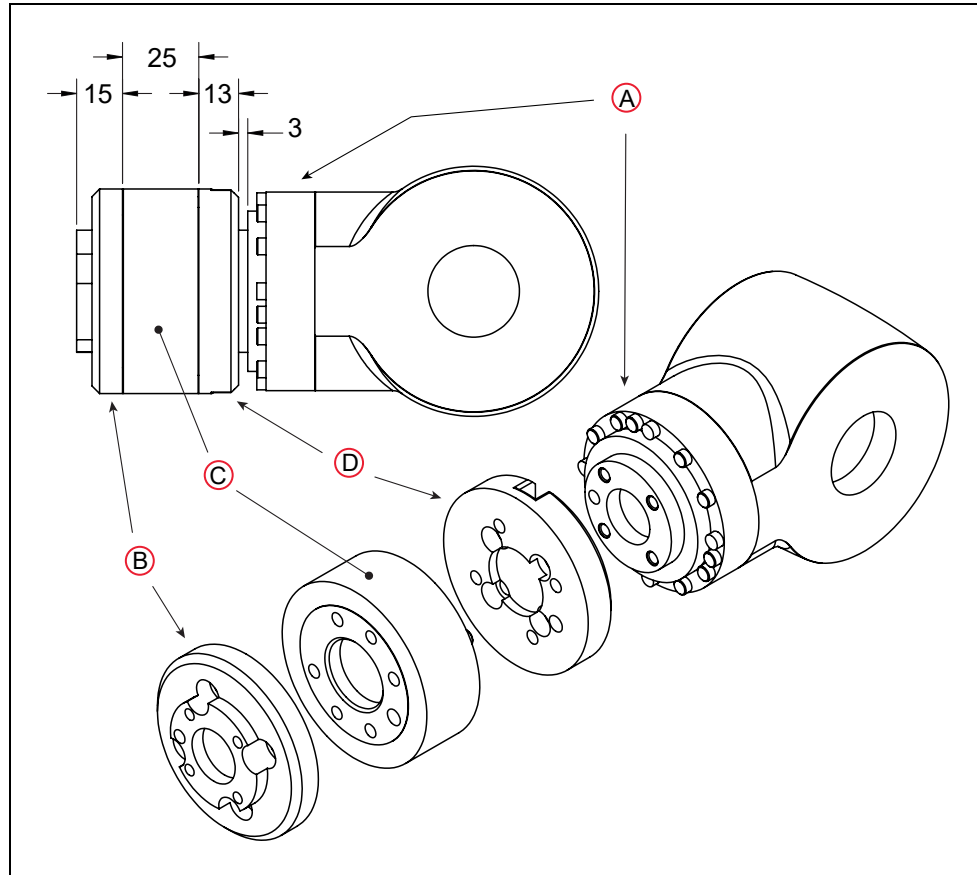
Side View for Viper, Sensor, Adapters, and Robot Flange. Units in mm.
